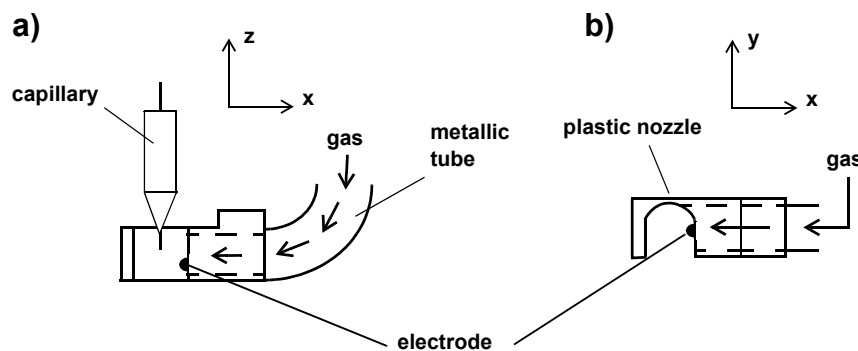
Illustration of the Cu kit on the Esec 3100 thermosonic ball bonder: a) front view, and b) top view. The metallic tube has an inner diameter of 1 mm.
